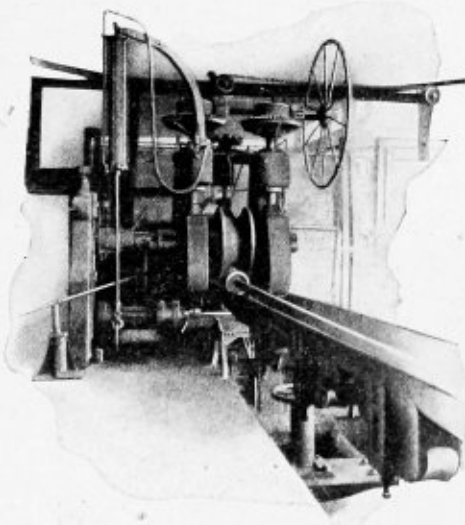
WELDING ROLLS WITH CAST IRON MANDREL IN POSITION.
